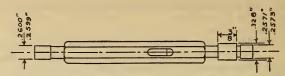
"Go" and "not go" gage for depth of threaded recess, and shank bore, A size
